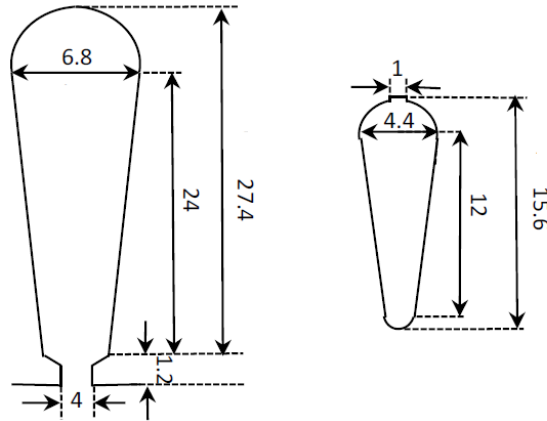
Stator (left) and rotor (right) slot geometries and dimensions [58].
